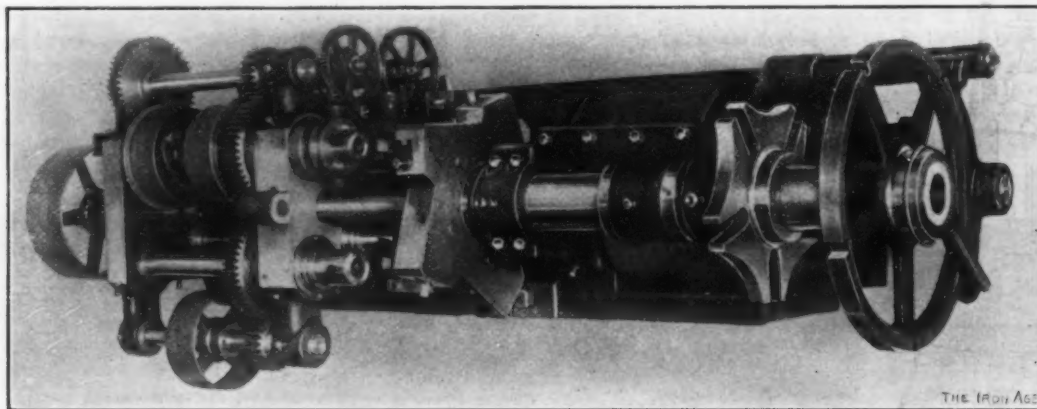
Top View of the Four-Spindle Automatic Turret Machine.
